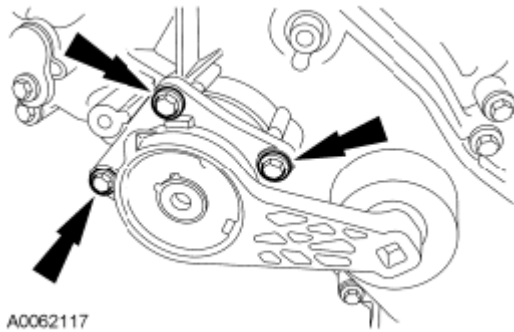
Locating Accessory Drive Belt Tensioner Bolts
